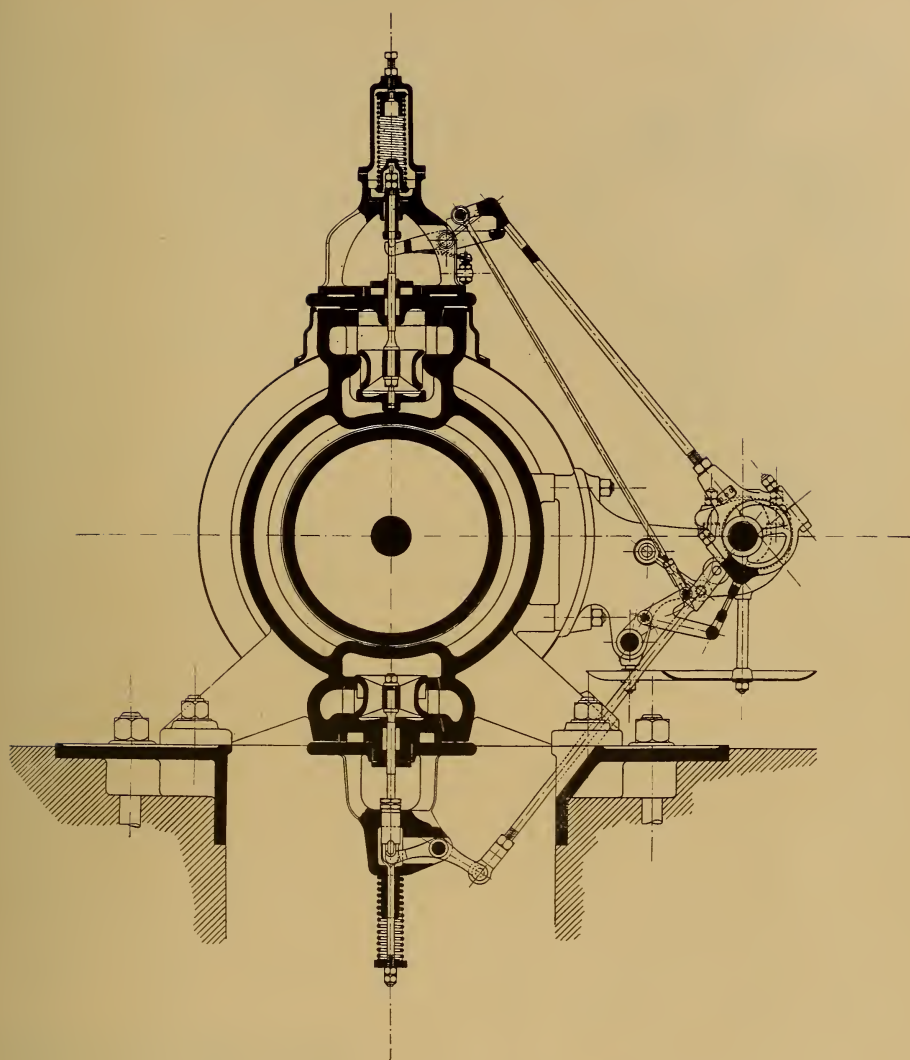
SECTION OF HORIZONTAL COMPRESSOR SHOWING CORLISS TYPE STEAM VALVE GEAR.
